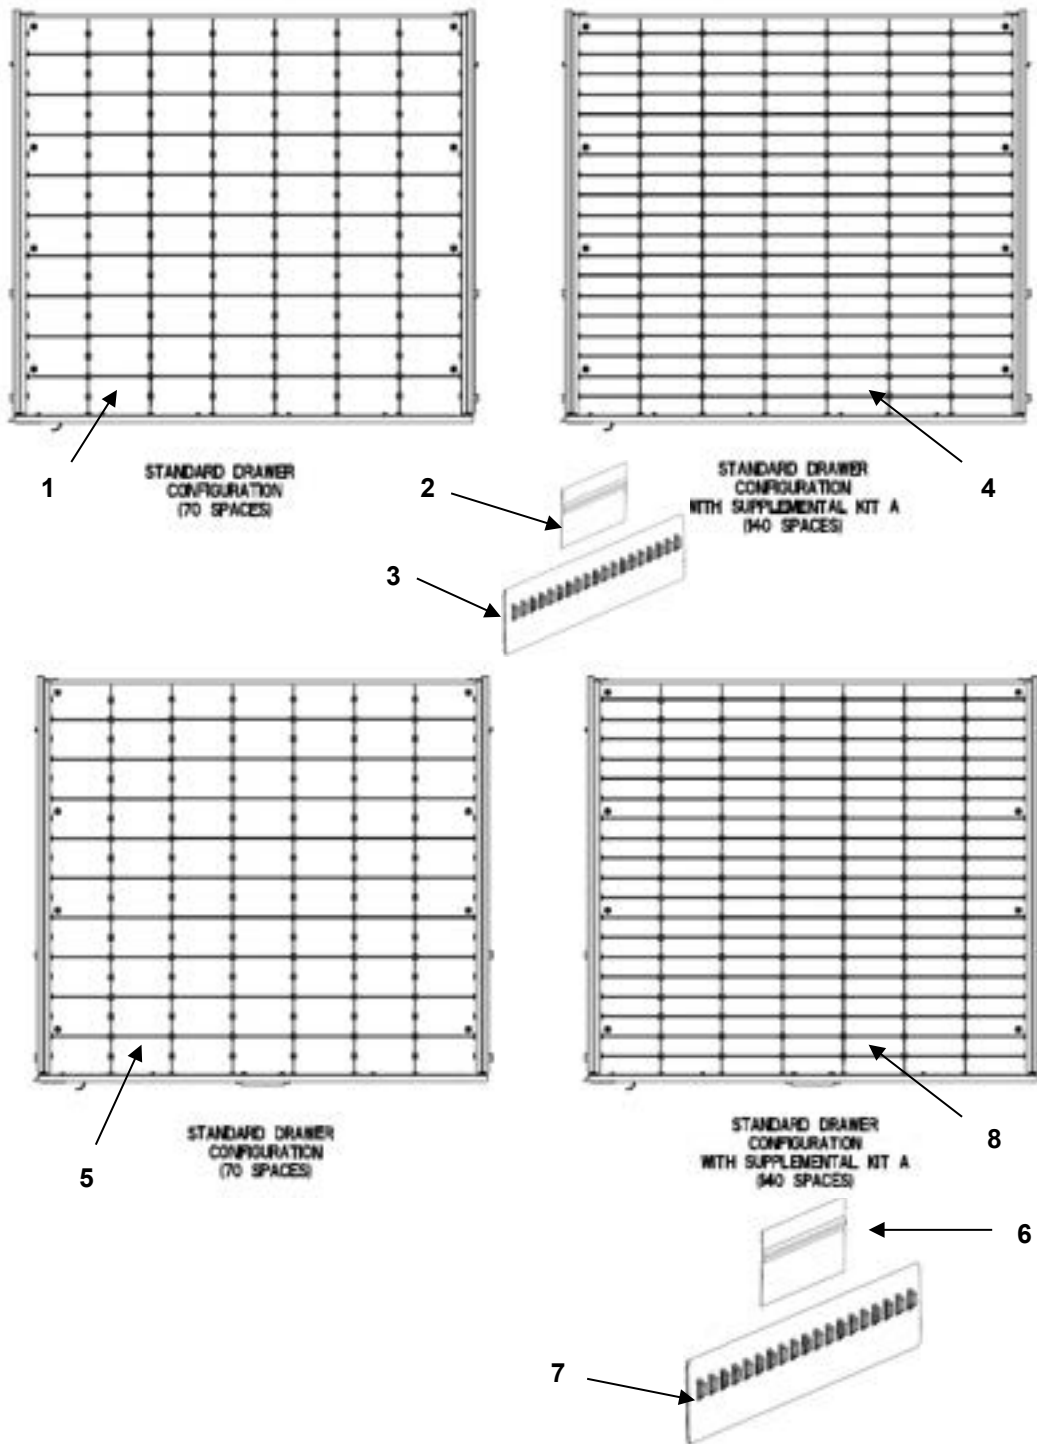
DRAWER DIVIDER SETS 4" and 6"
